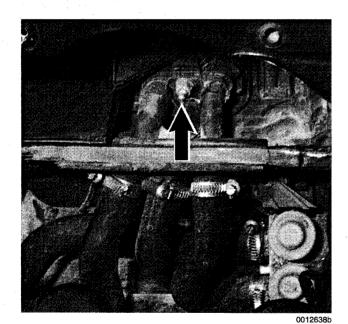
Nut retaining coolant hose flange at bulkhead (arrow).
